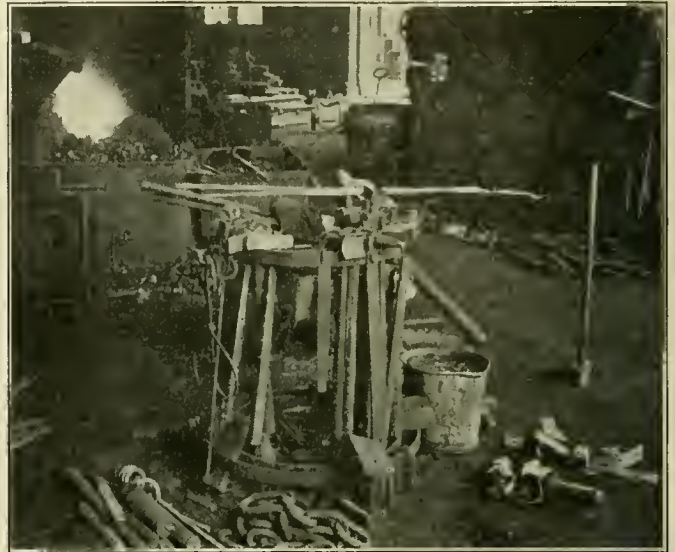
Handy Tool Rack With Sheet Iron Drawer
